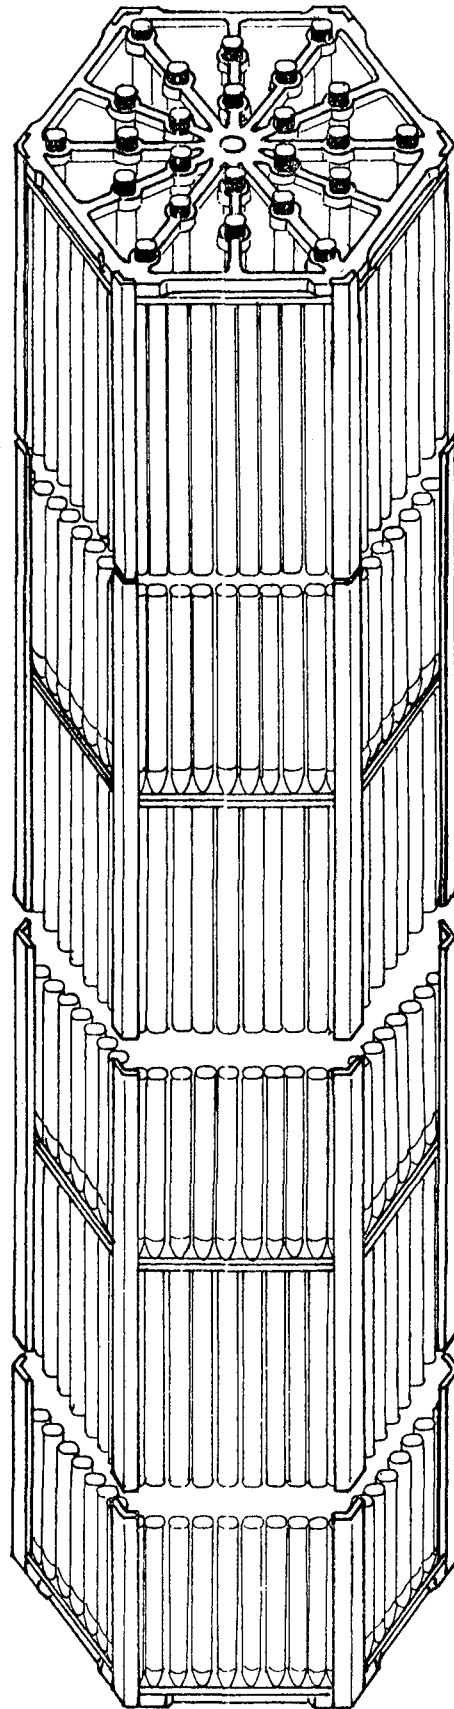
CAREM 15 - Fuel Assembly (Version B)
